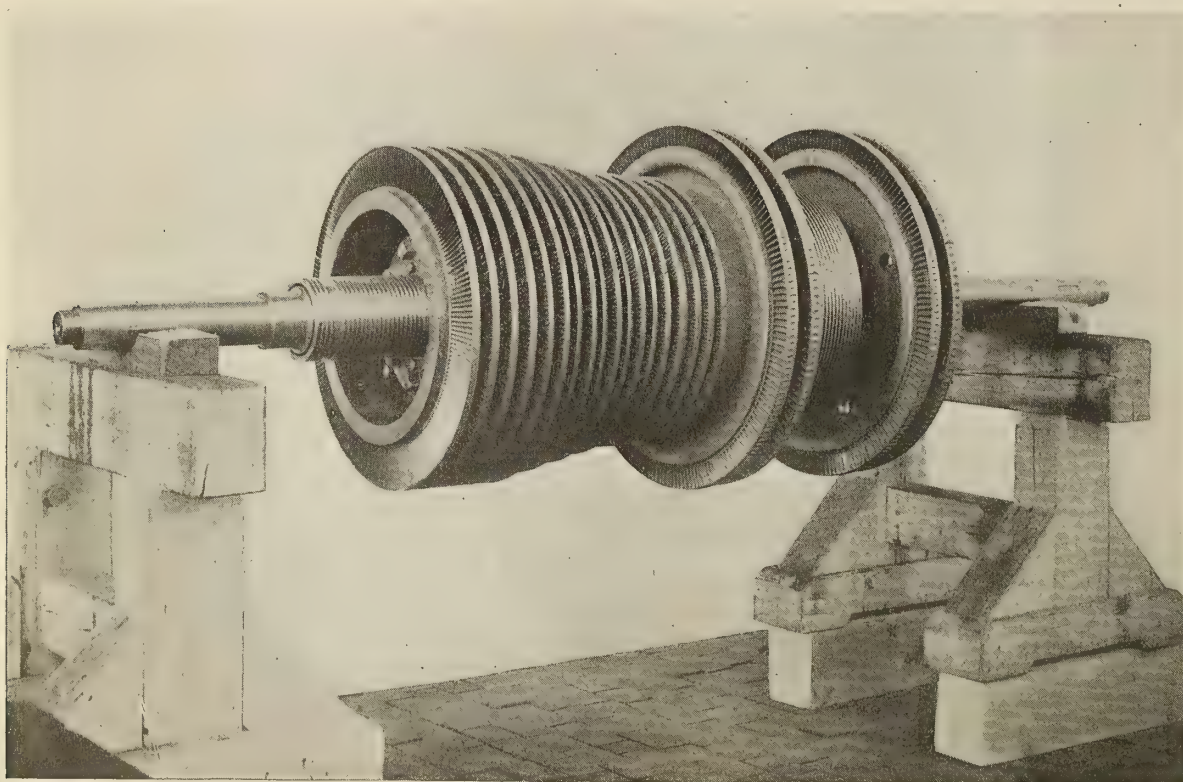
Rotor of 7,000 Horsepower Turbine
